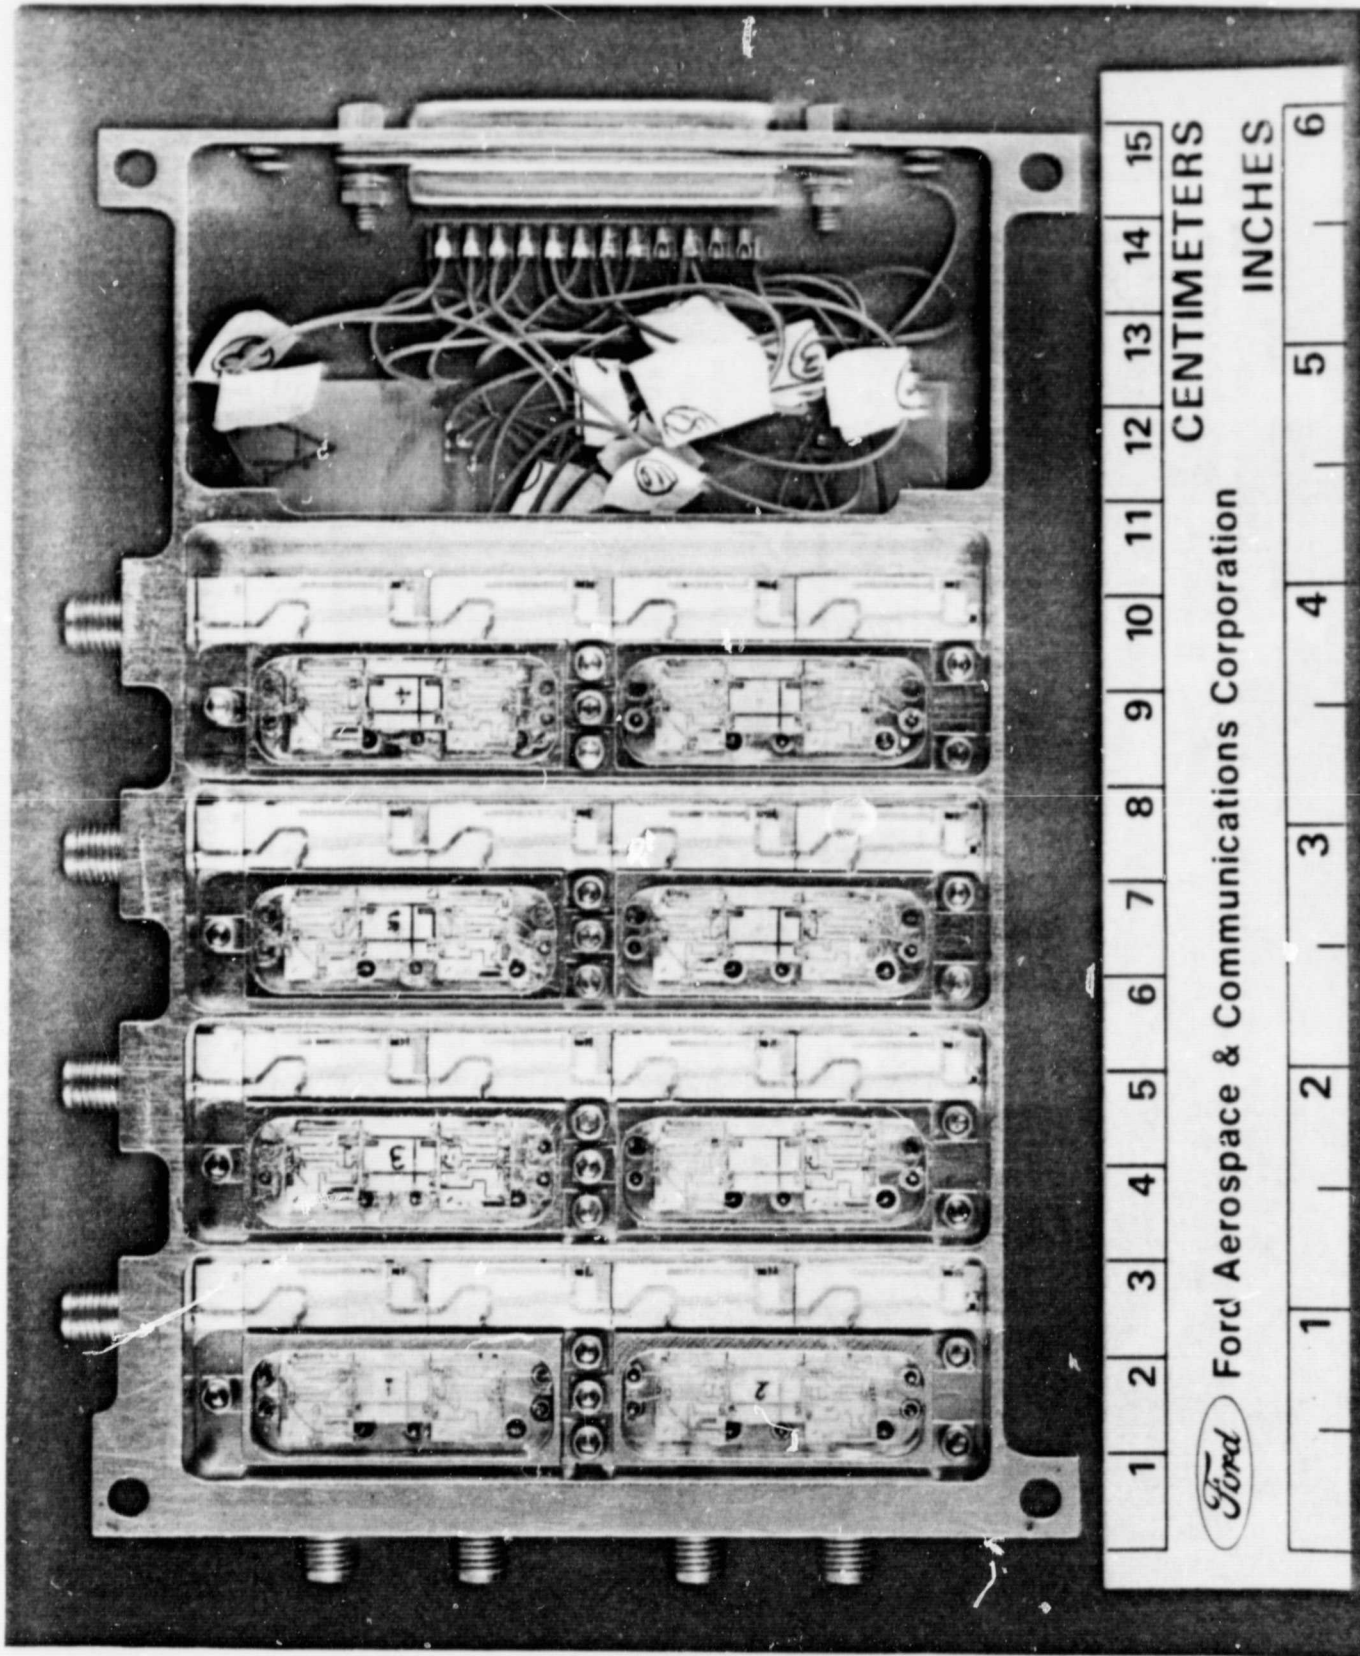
BREADBOARD IF SWITCH MATRIX BOTTOM VIEW
